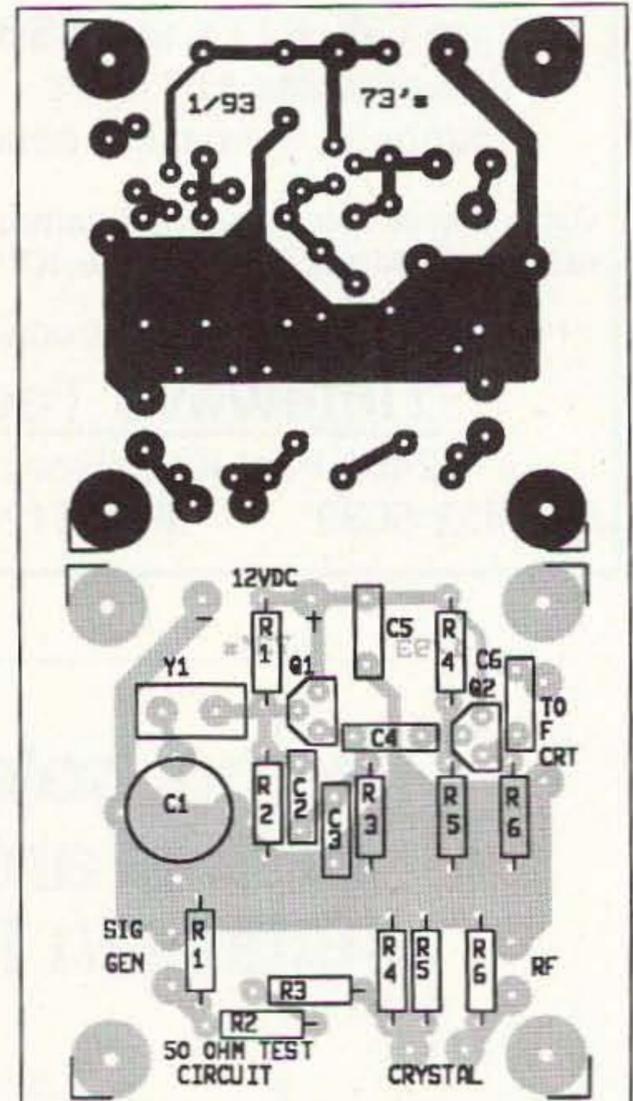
(a). PC board foil pattern for the oscillator circuit. (b). Parts placement. Note that the 50-ohm test circuit shown in Figure 3 is incorporated on this board.
